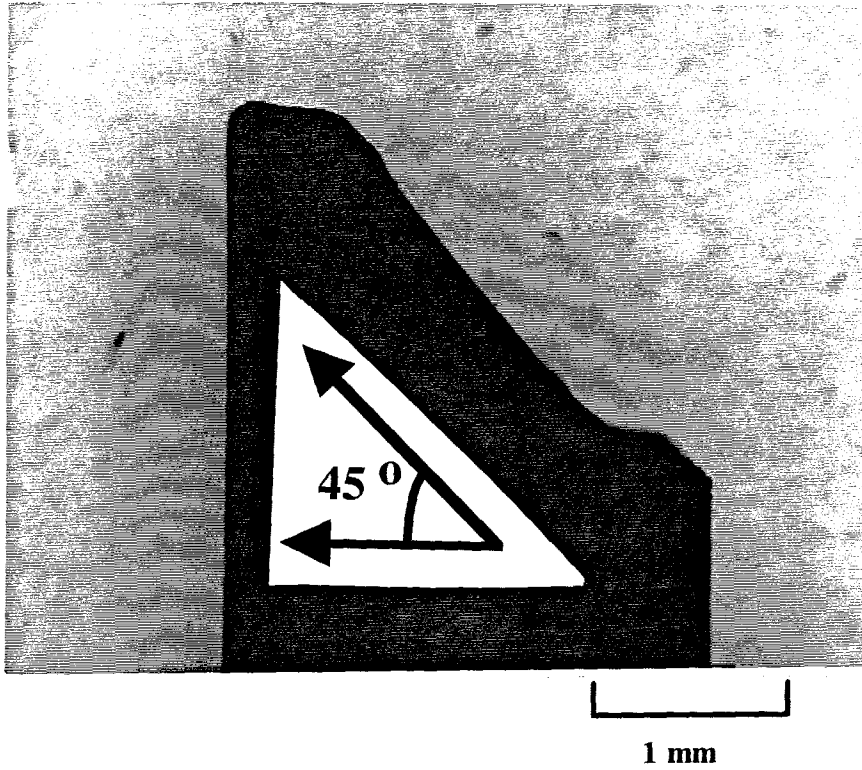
Orientation of fracture surface for 2.5 mm diameter quasi-static compression test specimen.
